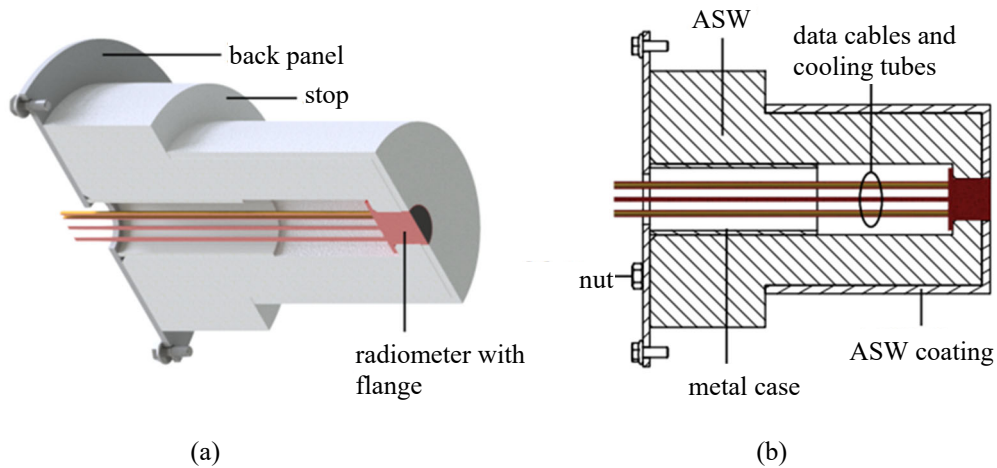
Radiometer socket with radiometer in half section as CAD model (a) and as technical drawing (b).
